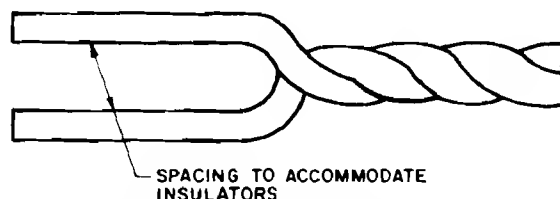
Method of Twisting Wires for Gas and Electric Arc Welding
